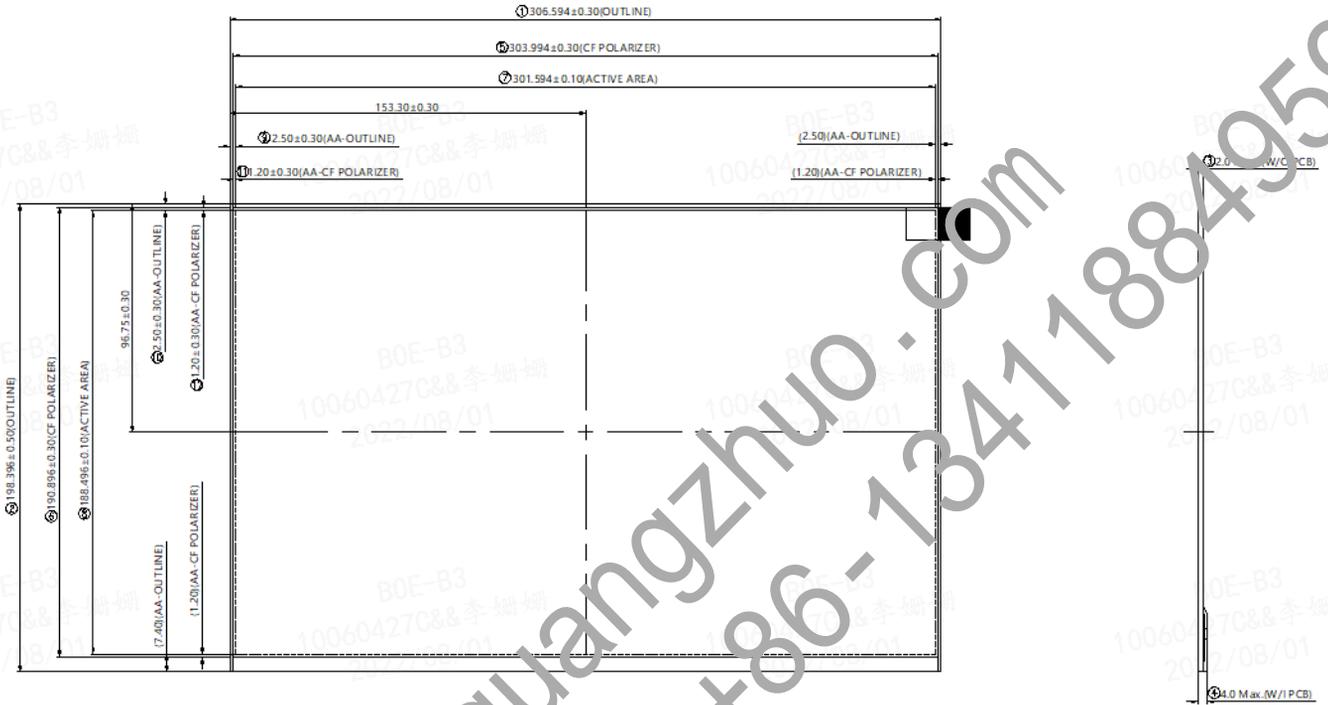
TF1-LCD Module Outline Dimension (Front View)
